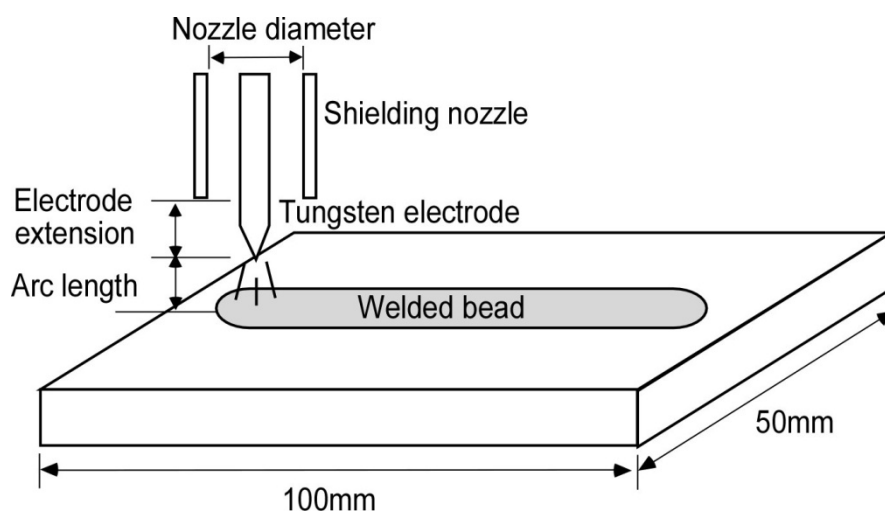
Schematic illustration of GTA welding experiment
